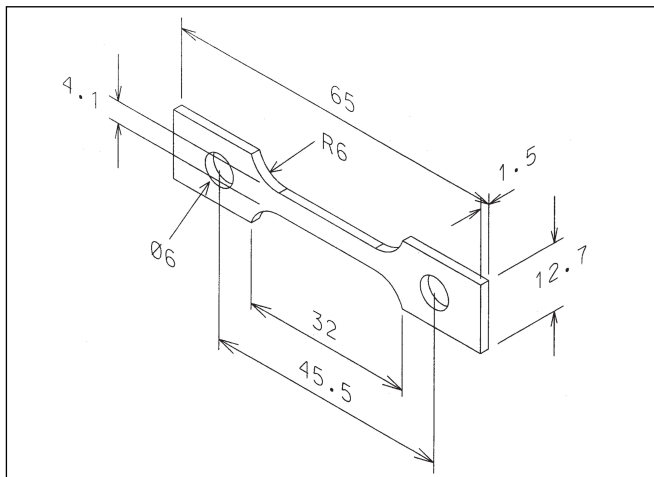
HAZ tensile sample design. Dimensions are in mm.
